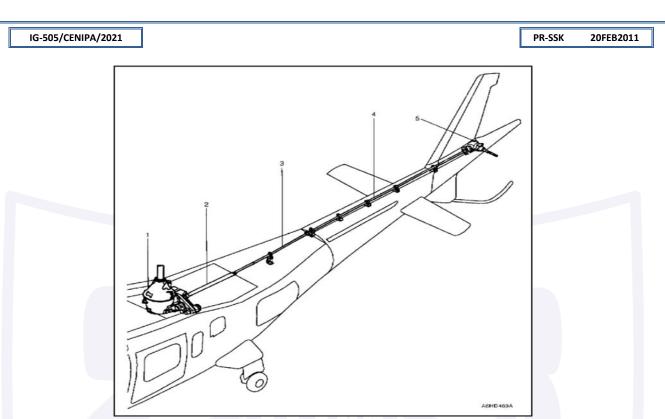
Tail rotor drive system components: (1) Main Transmission; (2) Forward Section; (3) Middle Section; (4) Long Section and (5) 90^o Gearbox.
